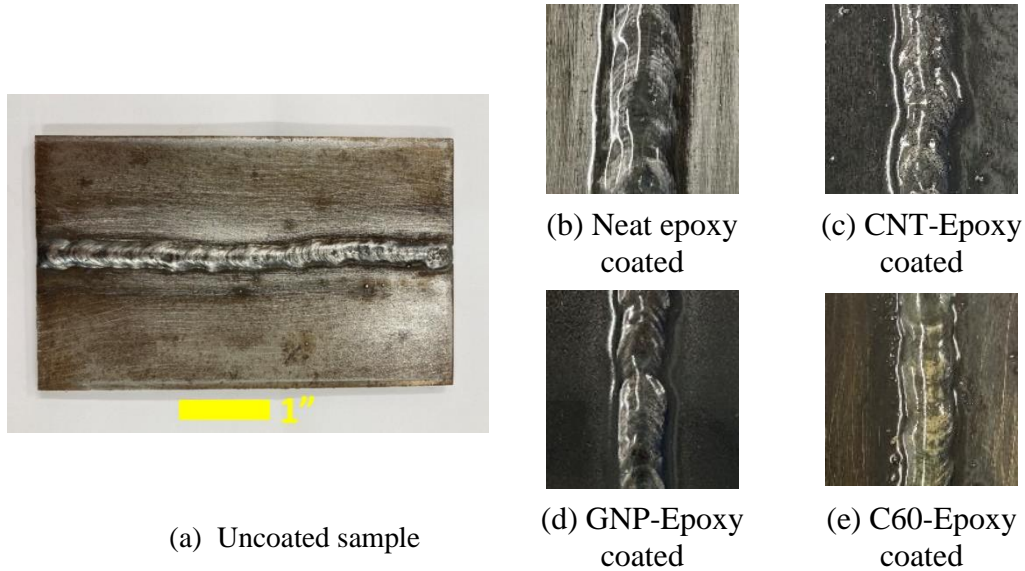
The appearance of welded joints (a) before, and (b)-(e) after coating by prepared coatings
